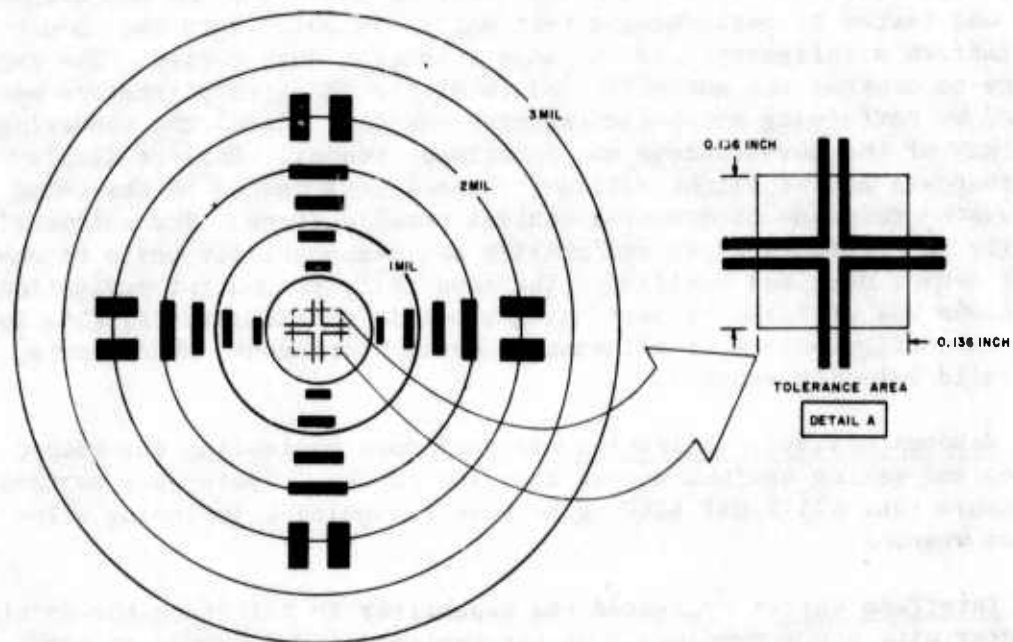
IMU Mount Boresight Tolerance.
